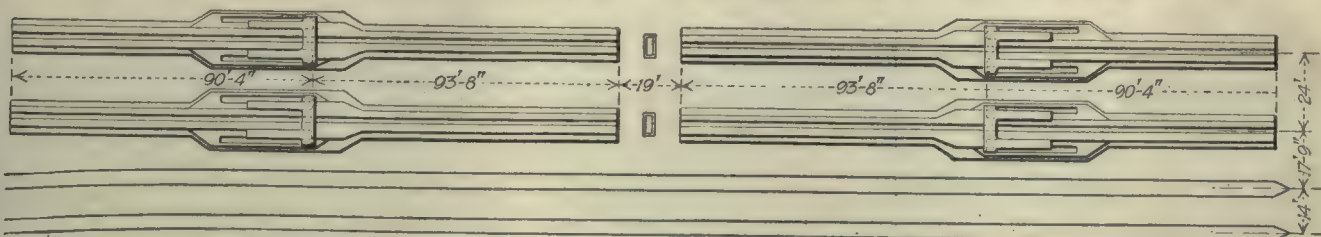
SHOP LAYOUT FOR FOUR 90-FT. PLANING MACHINES
